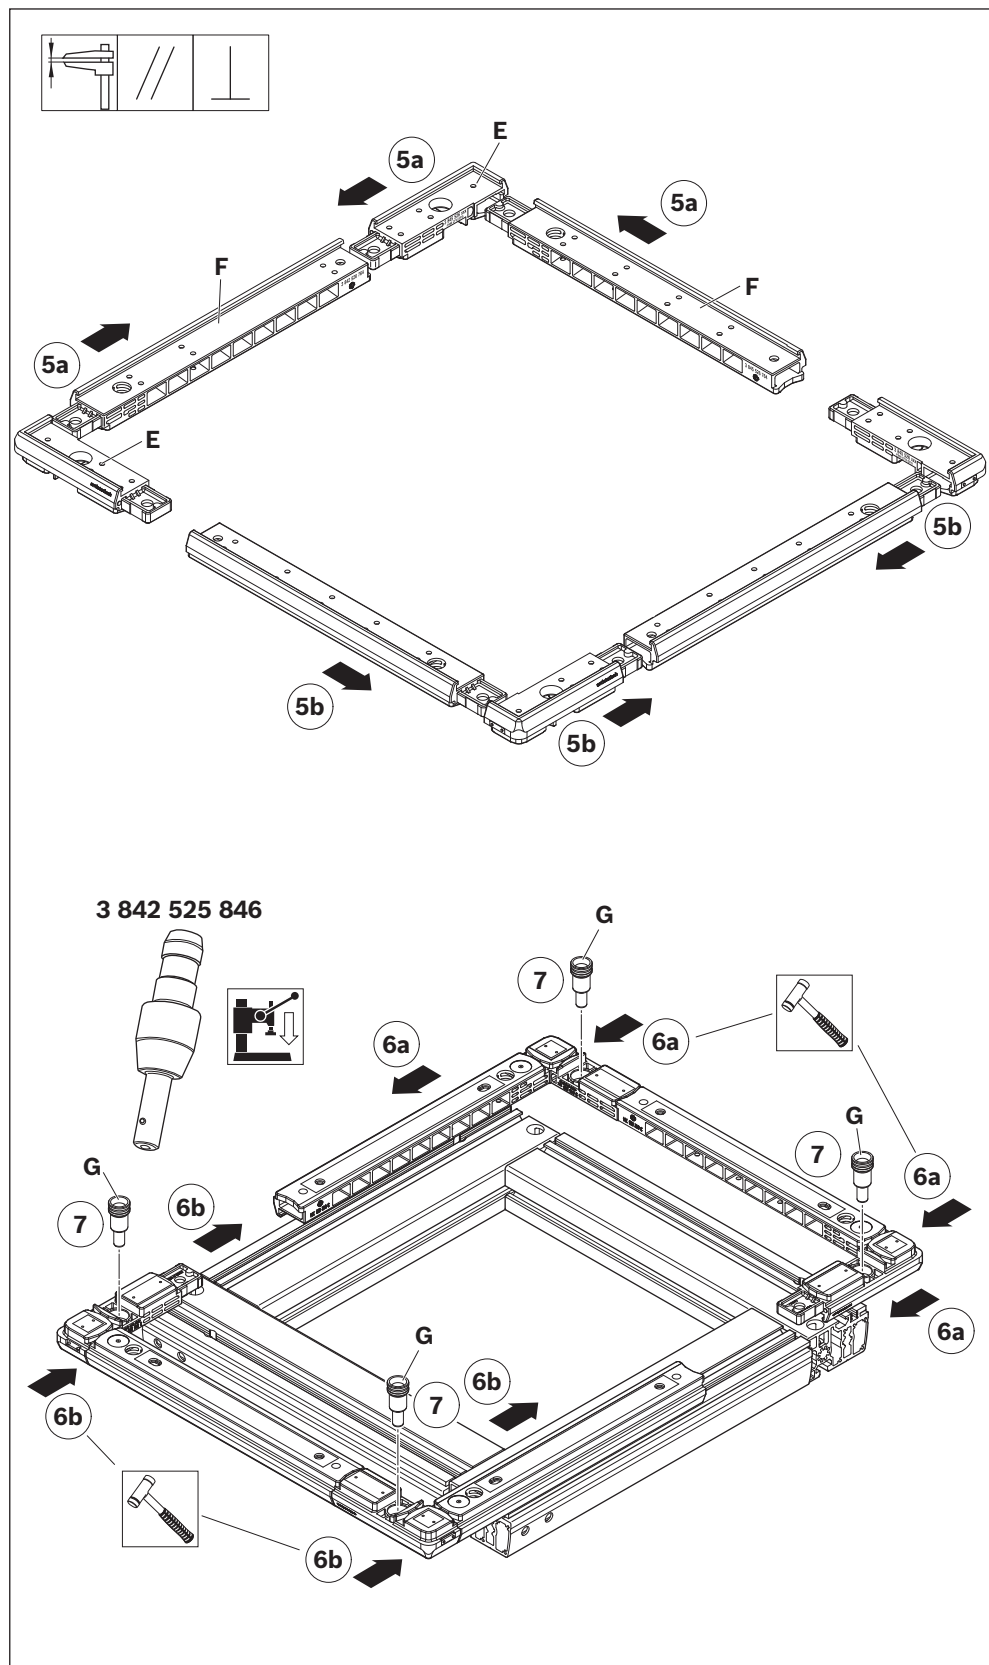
Assemble workpiece pallet WT 2/F-H (2/2)
